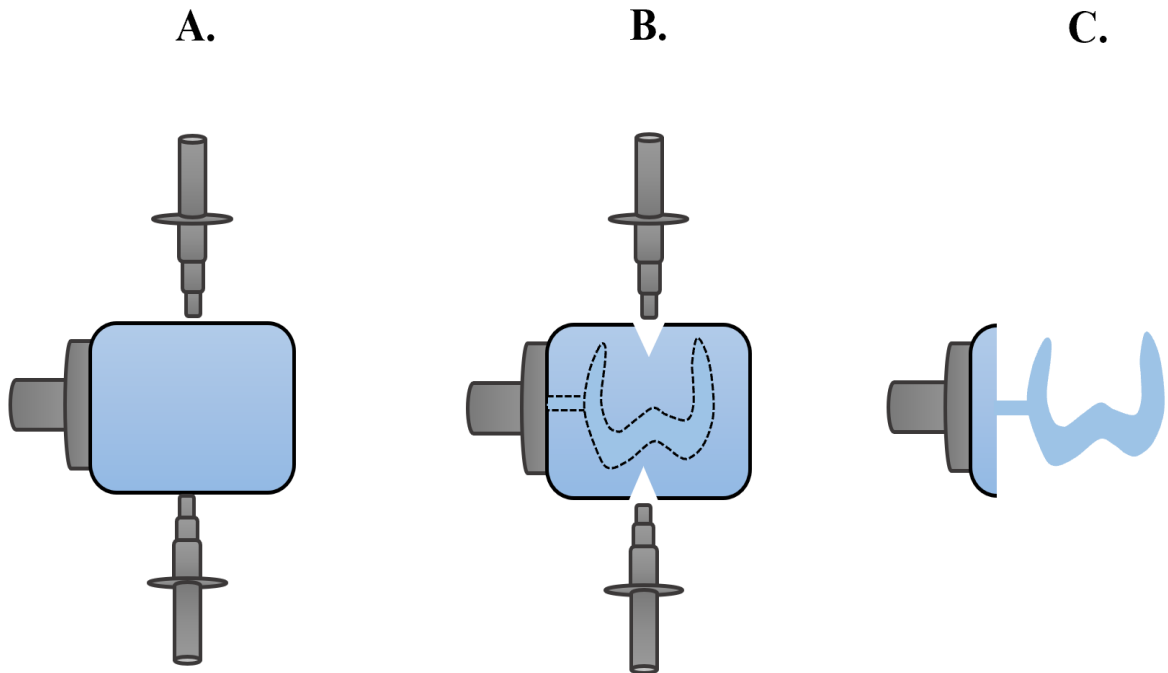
Graphical demonstration of subtractive machining. A - Ceramic block with diamond or carbide burs ready for grinding/milling process B - Start of grinding/milling process. C - Grinded/Milled required shape of dental ceramic restoration still attached with sprue to the rest of the dental ceramic block.
